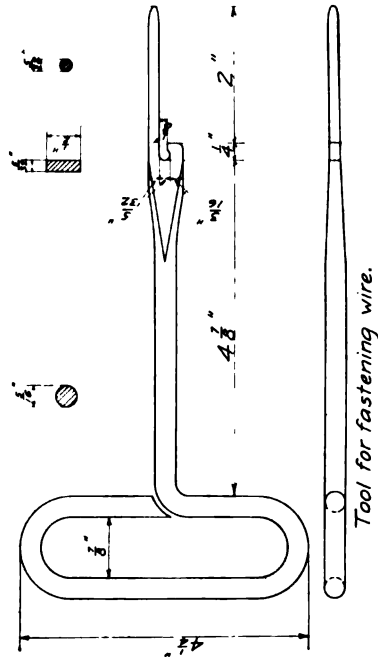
METHOD OF FASTENING WIRES ON CONCRETE FENCE POSTS.
